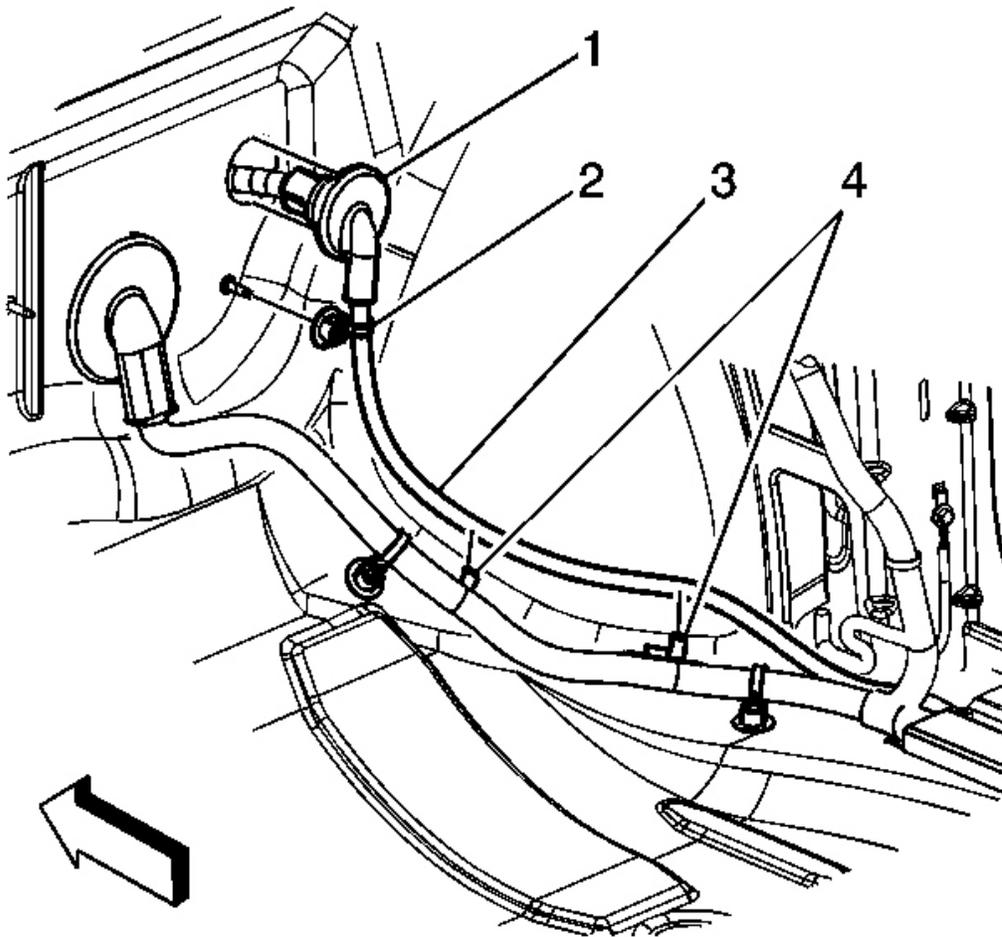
Identifying Body Wiring Harness, Electrical Connector & Positive Battery Cable Clips
